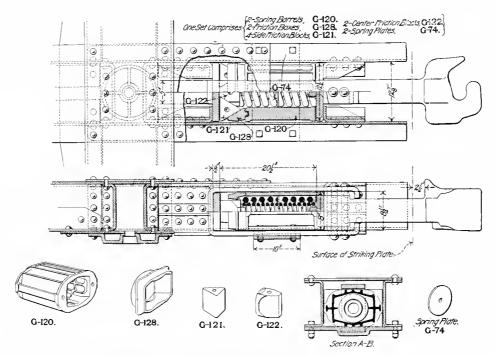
Westinghouse Friction Draft Gear. Pressed Steel and Forging Attachment for Freight Cars with Wooden Sills. Westinghouse Air Brake Co.
